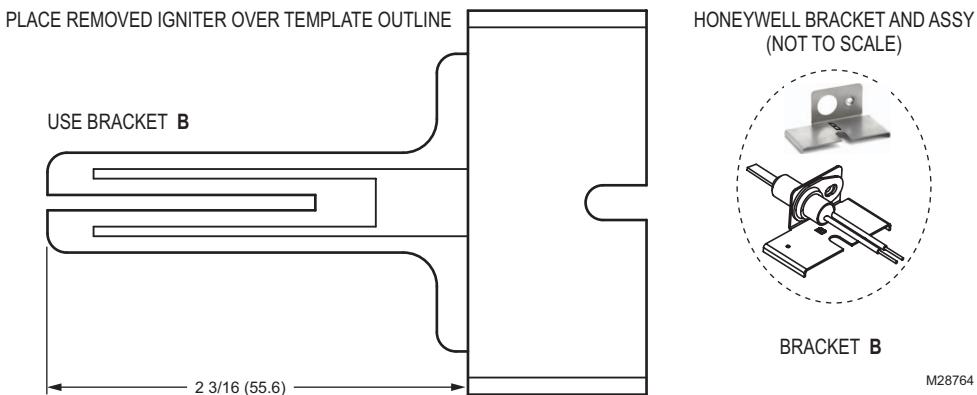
Igniter bracket B template; dimensions in in. (mm).
